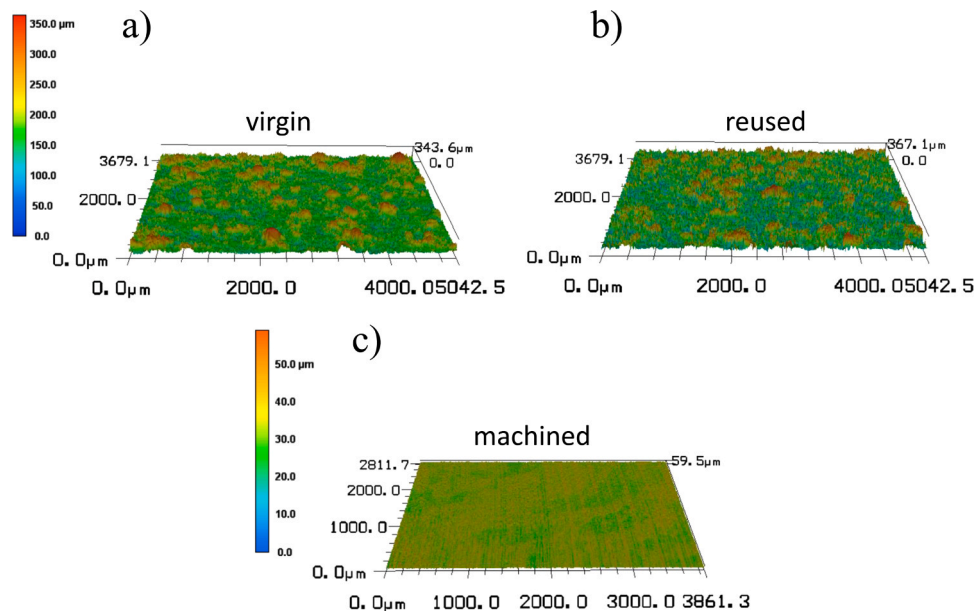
3D surface profile of specimens: (a) as-built from virgin powder, (b) as-built from reused powder and (c) after machining.
